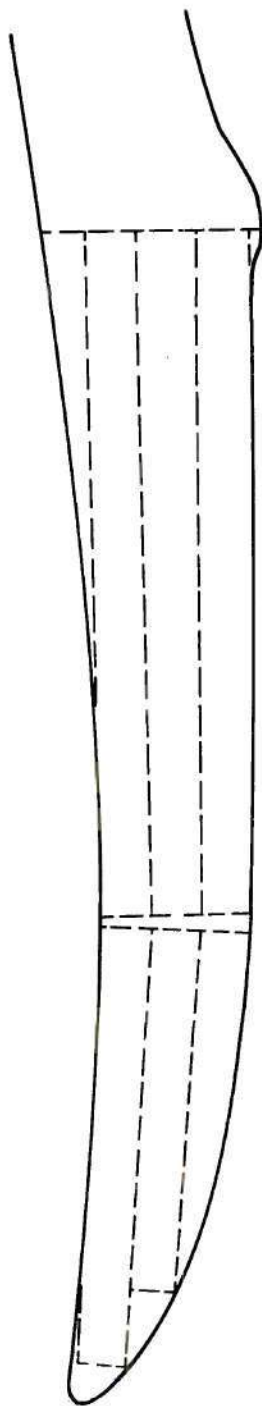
Sectioning of Hardened Knife Blanks for Bending Test Specimens.
